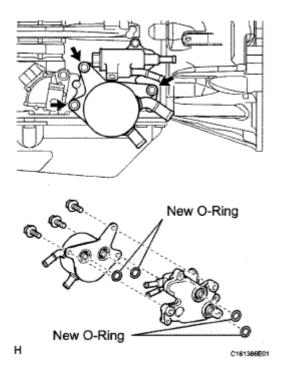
Identifying Automatic Transmission Assembly Bolts And O-Ring (W/ Trailer Towing System)
